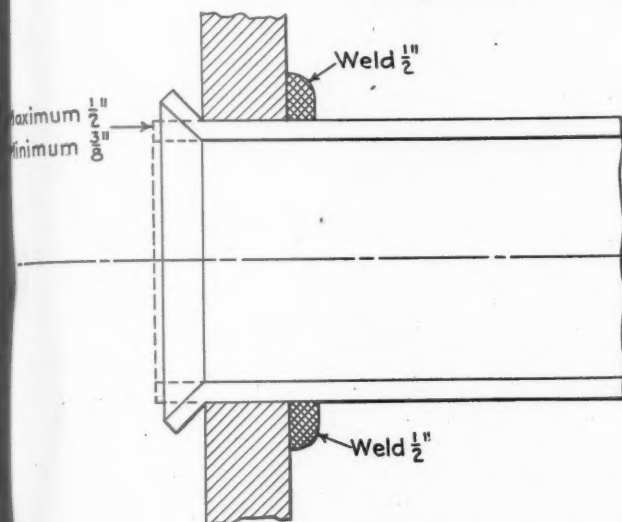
A method of reinforcing the door sheet around arch-tube holes
